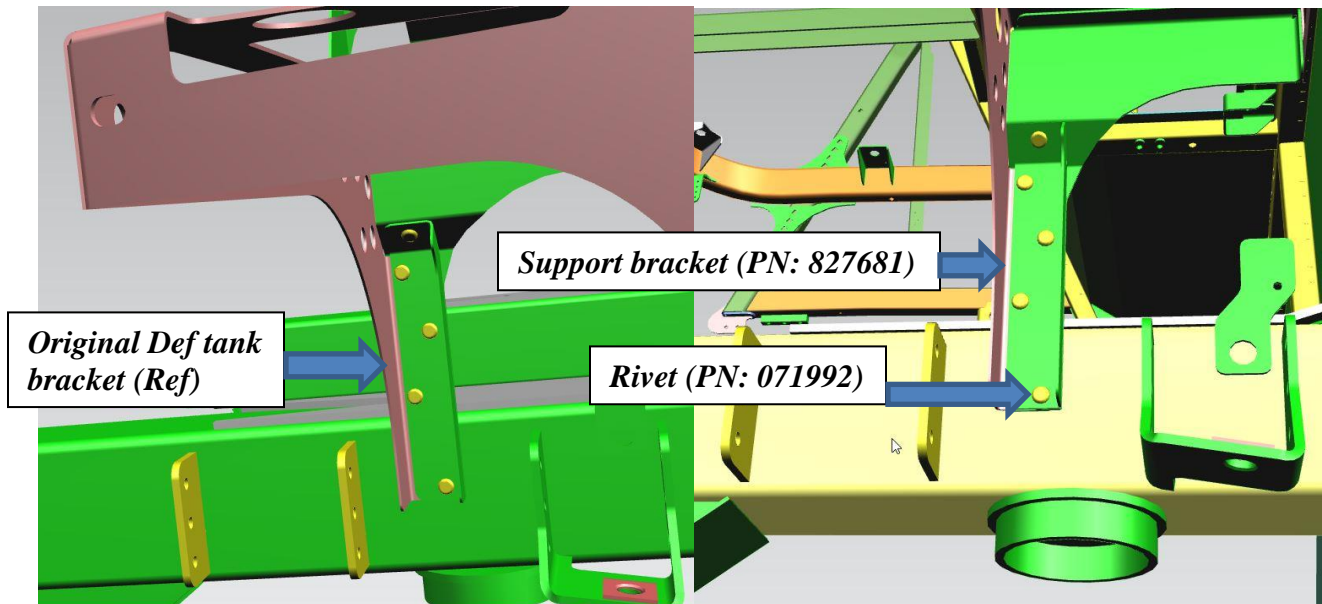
VIEW OF INSTALLATION OF THE DEF TANK SUPPORT BRACKET
